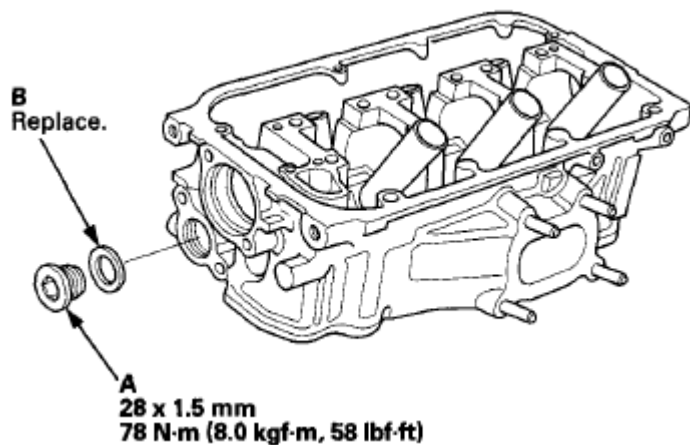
Identifying Sealing Bolts - Front With Torque Specifications
